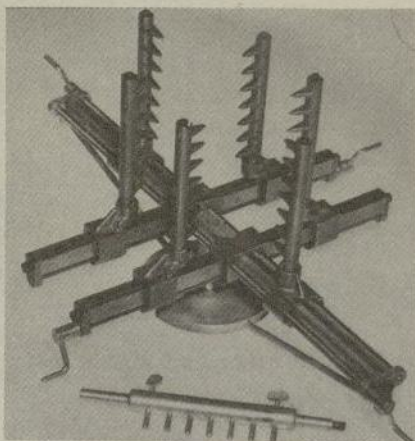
Coil winding drive and three-phase head. (Crown Industrial Products Co.)
